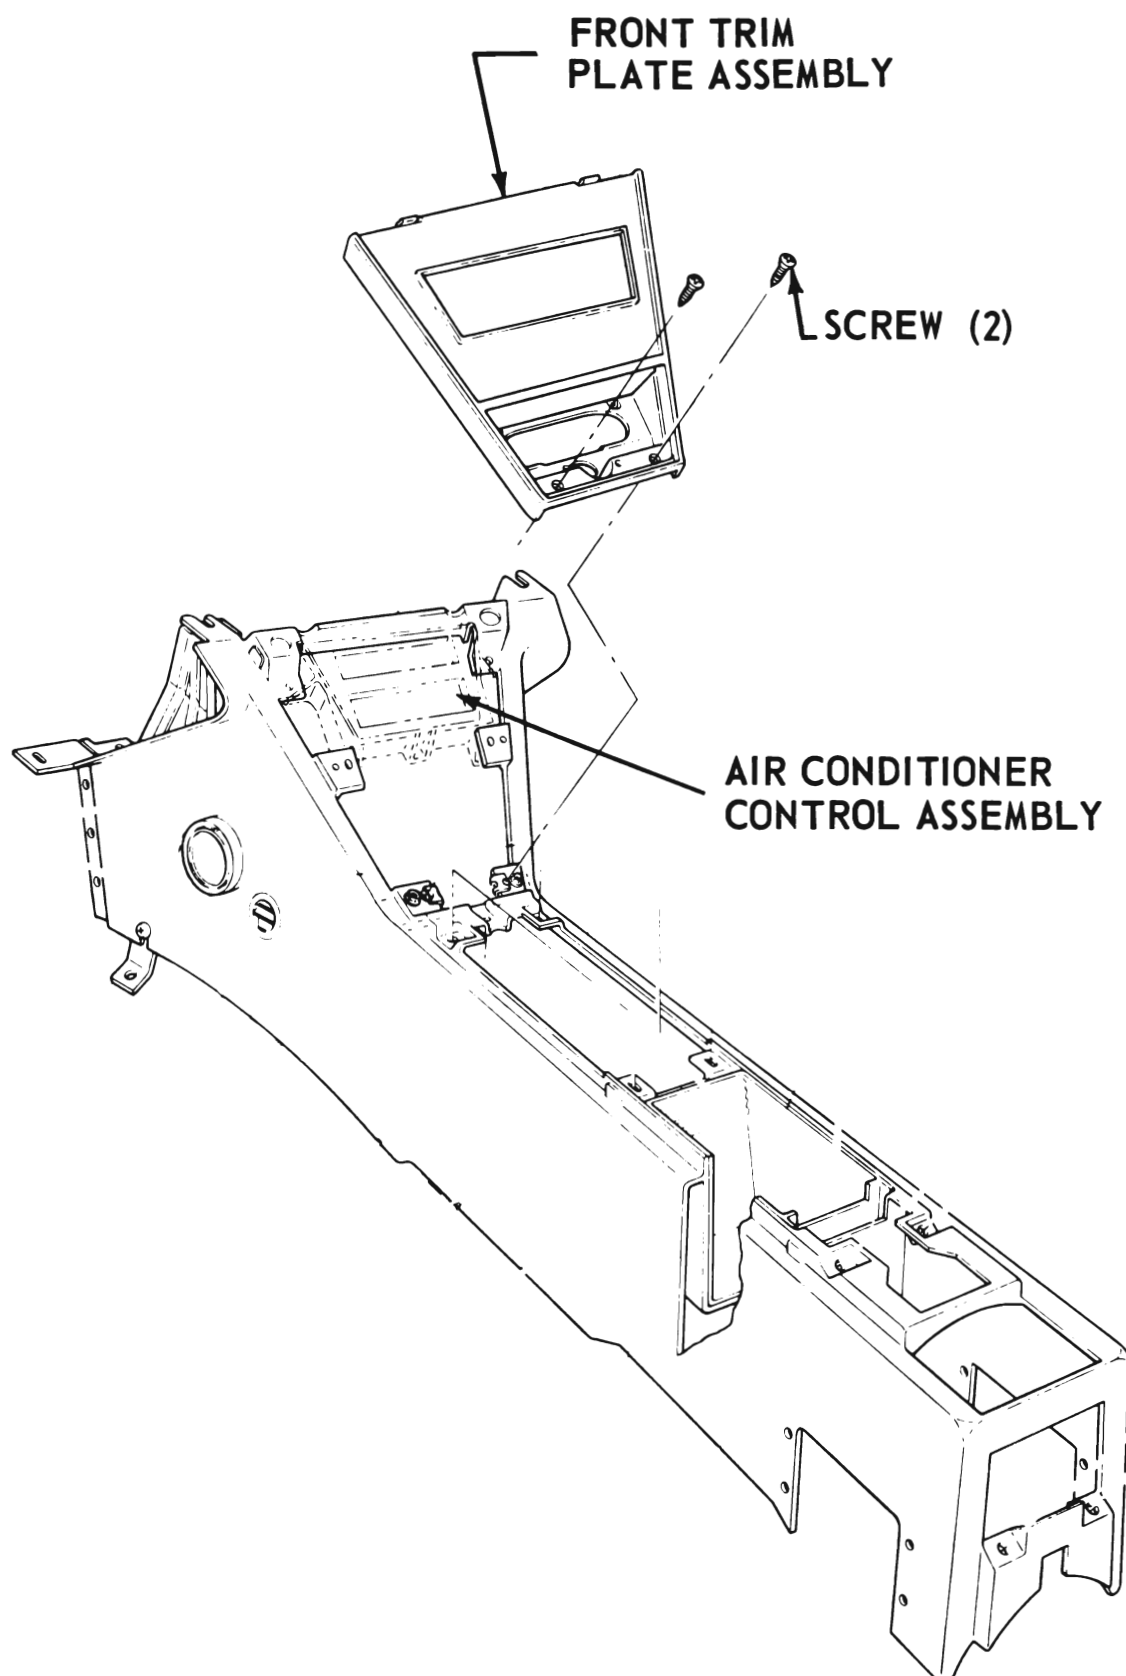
Center Console Front Trim Plate and Air Conditioner Control Assembly - 49000 Series
